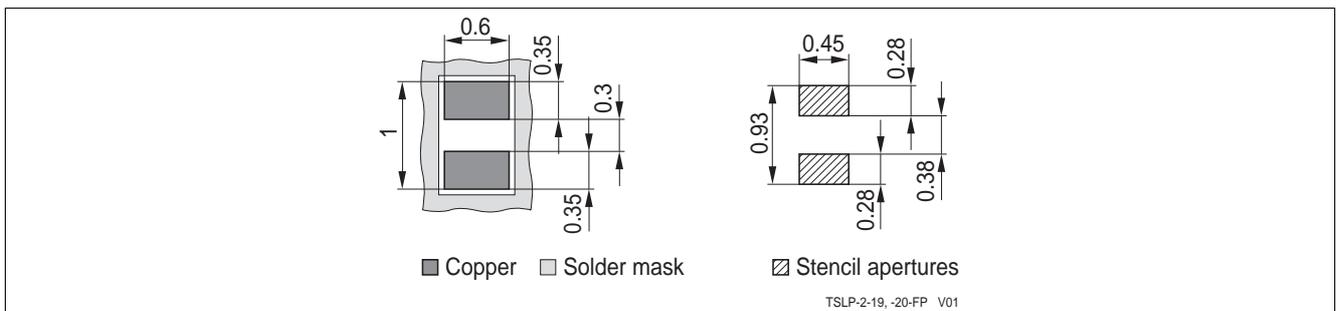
TSLP-2-19: Footprint (dimension in mm)
